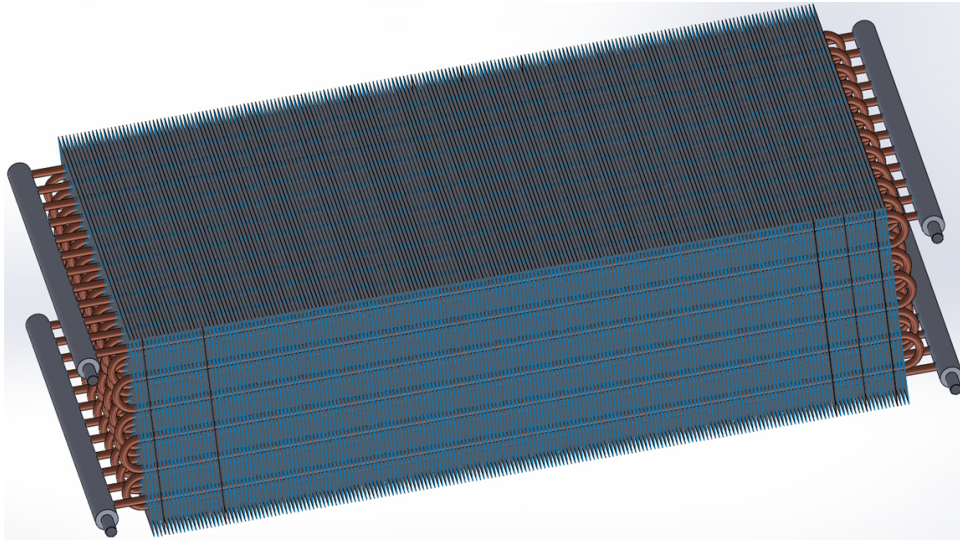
CAD render of the full-fledged heat exchanger prototype.
